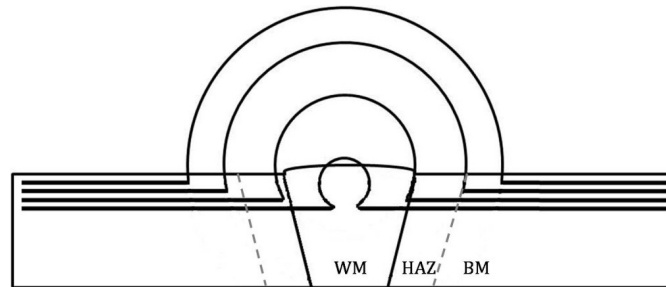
Cross-section schematic of flux leakage of a girth weld bead
